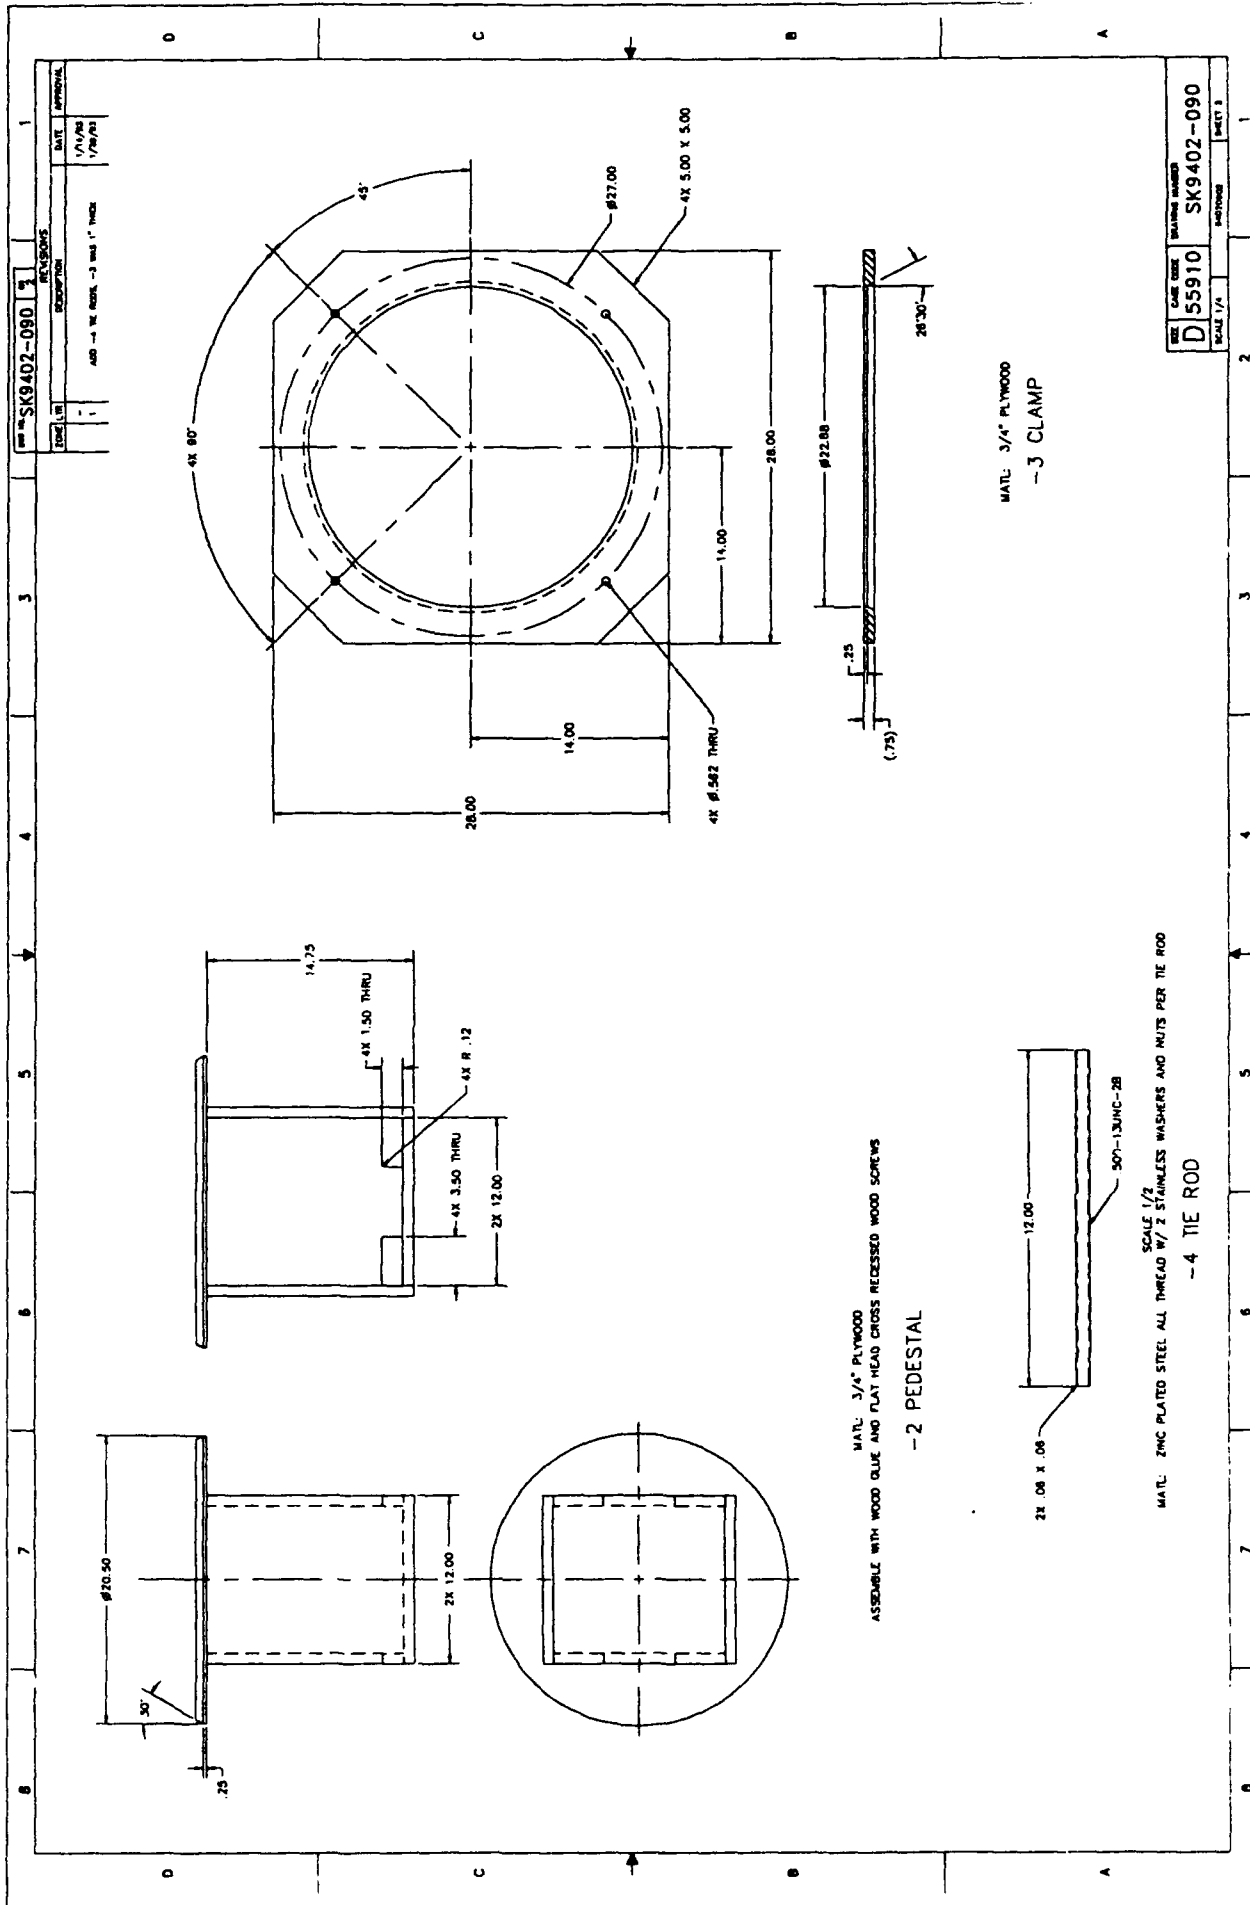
26-inch-housing aft and forward head assembly fixtures, sheet 2.
